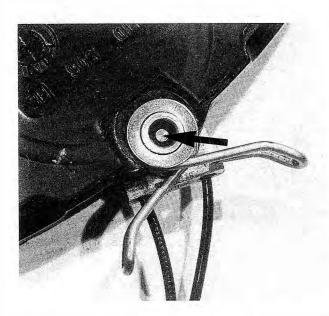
Front brake pad and wear sensor. Remove sensor from pad by driving pin (arrow) down.
